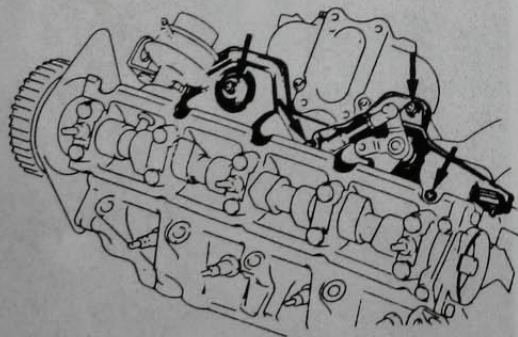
Heat shield and bellcrank mounting attachments (arrowed) at the inlet manifold - 1721 cc engines (Sec 18)
